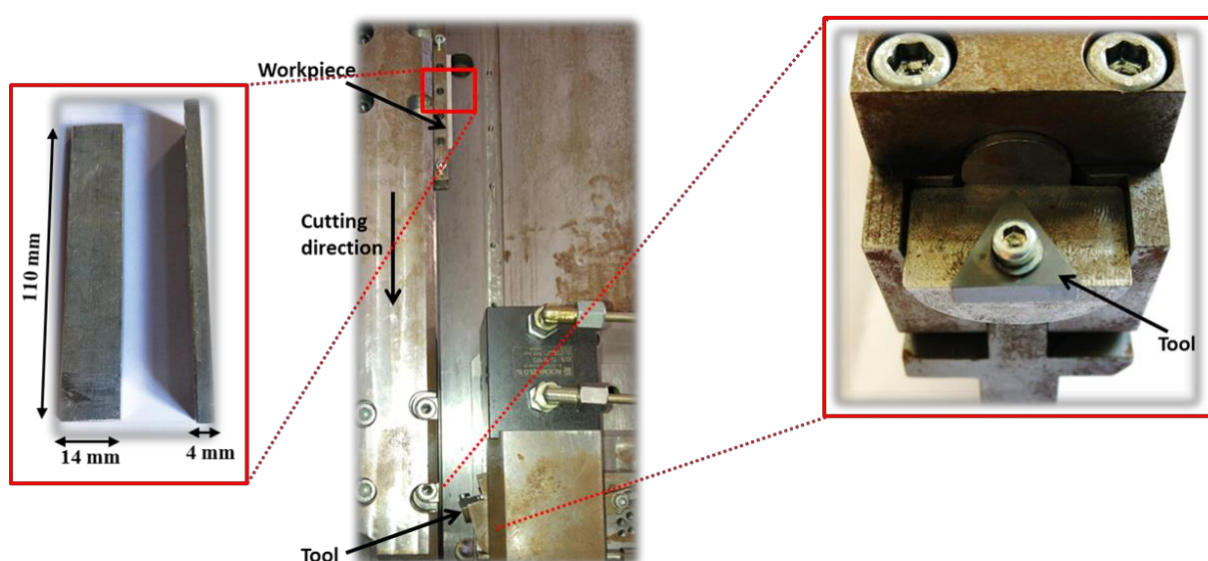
Experimental set up, workpiece and tool holder detail used to perform the orthogonal cutting.
